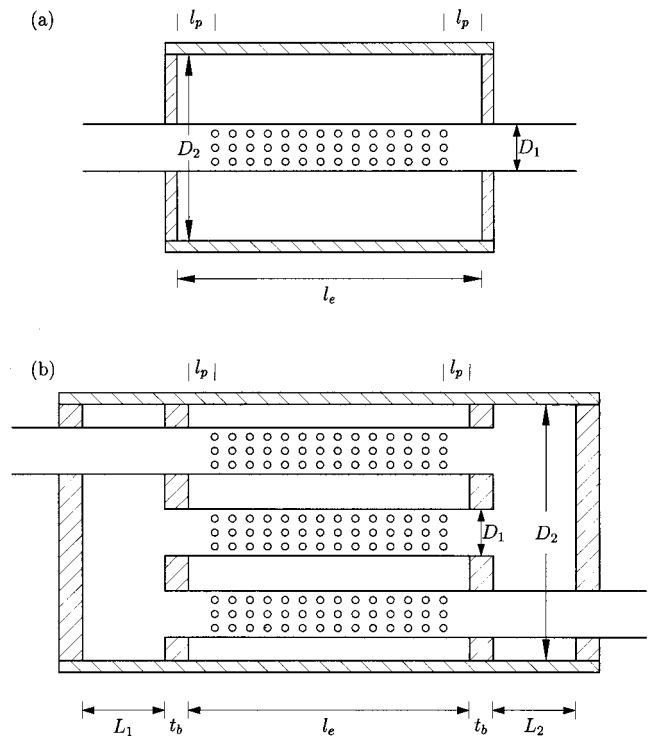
Schematic drawings of (a) single-pass resonator, and (b) prototype muffler geometries.
